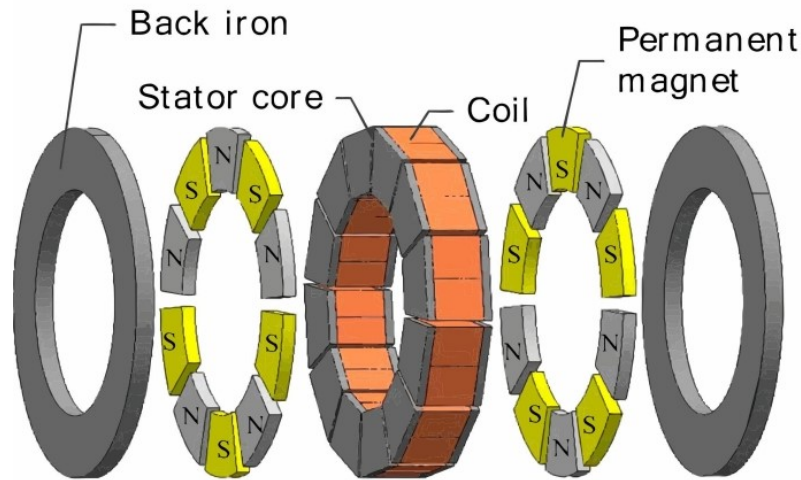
Double Rotor Single Stator Axial Flux Machine.
